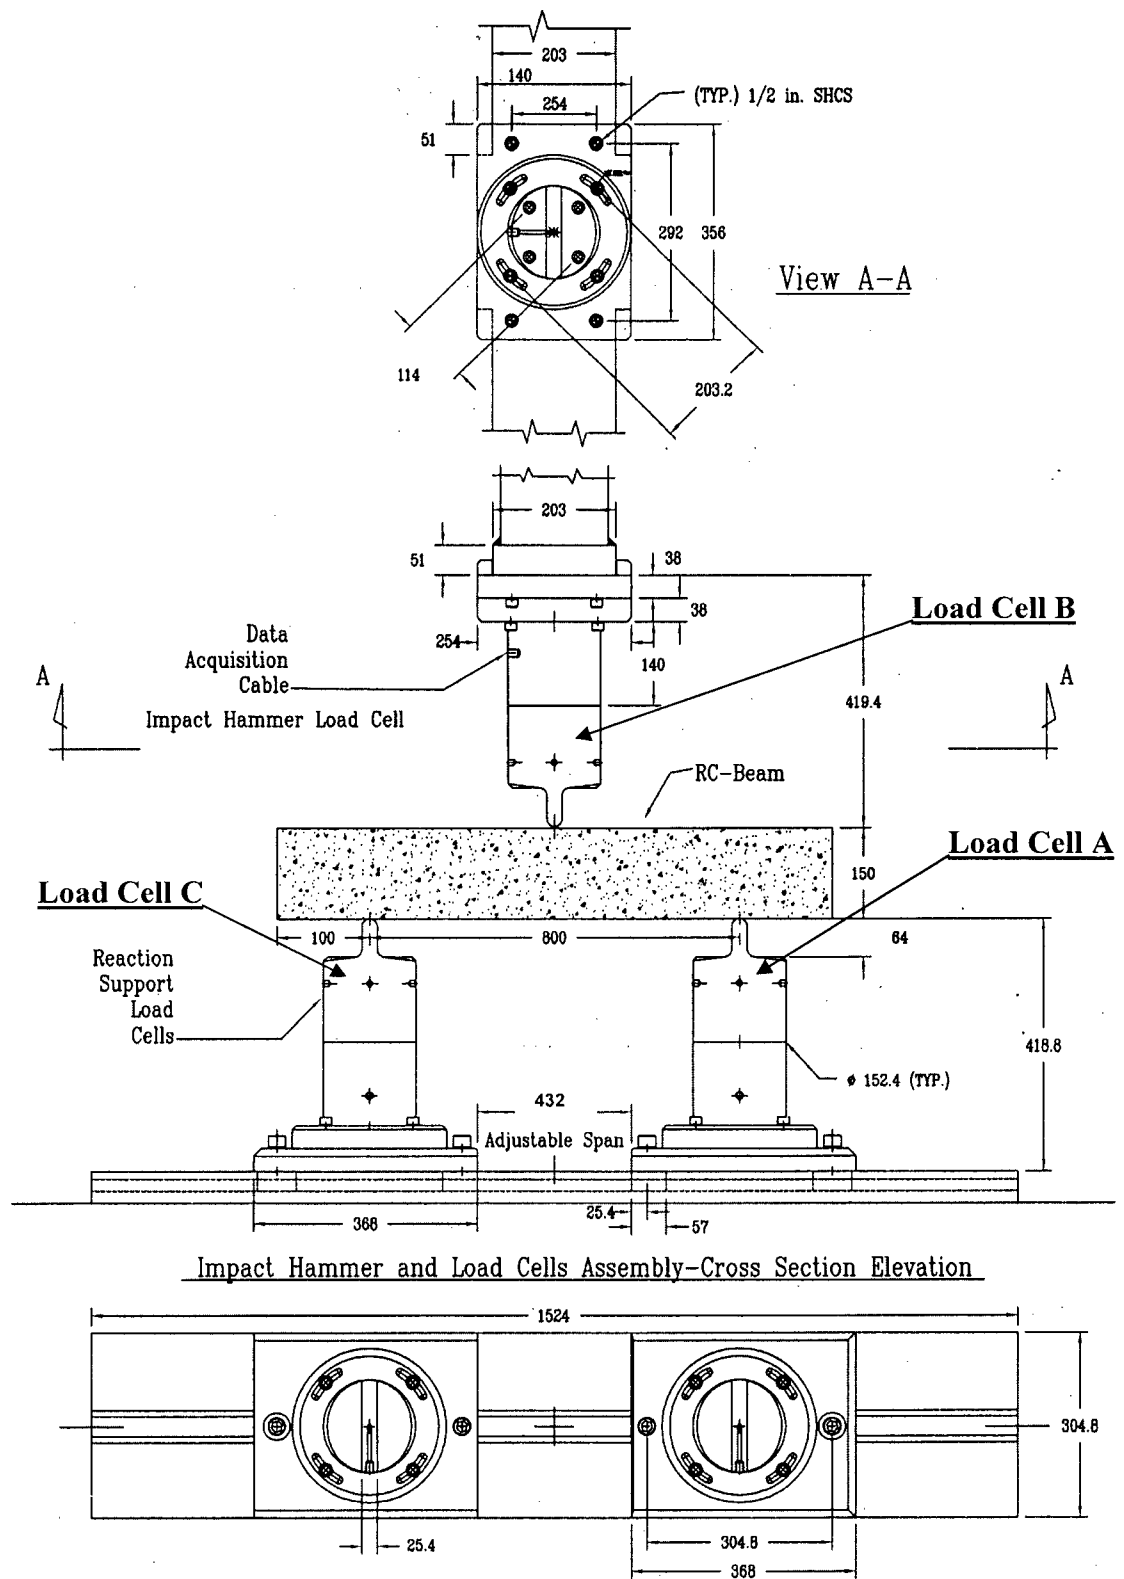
Anvil Support Load Cell Assembly – Plan and Elevation View
